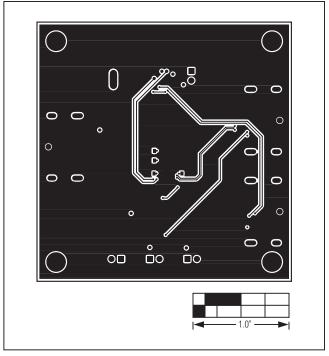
MAX14998 EV Kit PCB Layout—Solder Side
